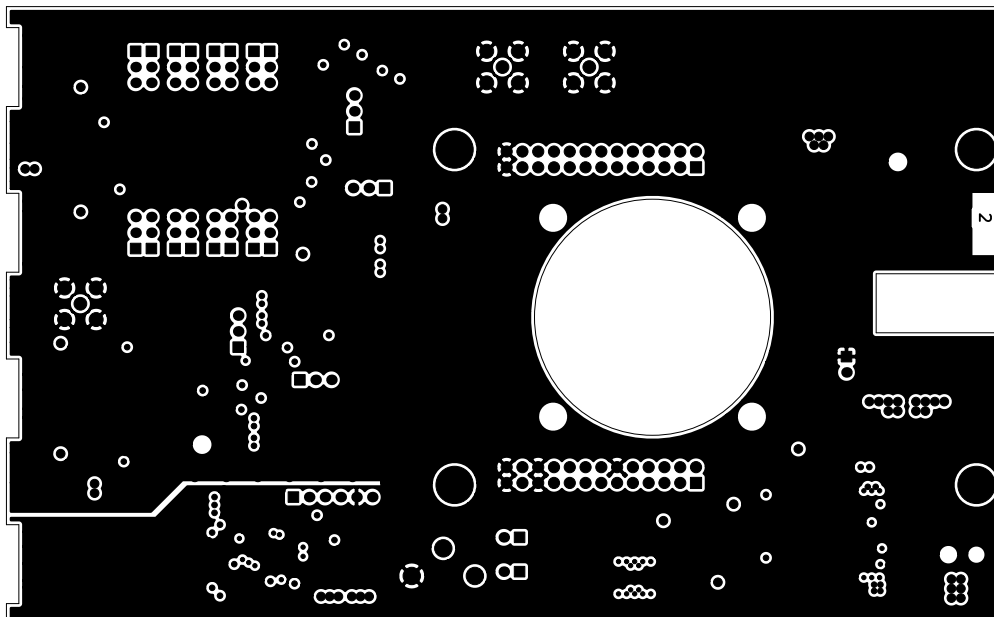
PCB layout - Inner layer 1 (Ground plane)
